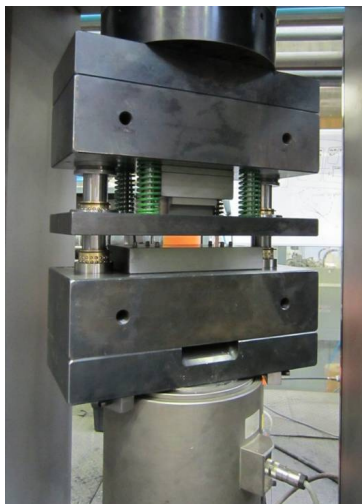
Laboratory tool for manufacturing of fatigue samples with representative punched edges
